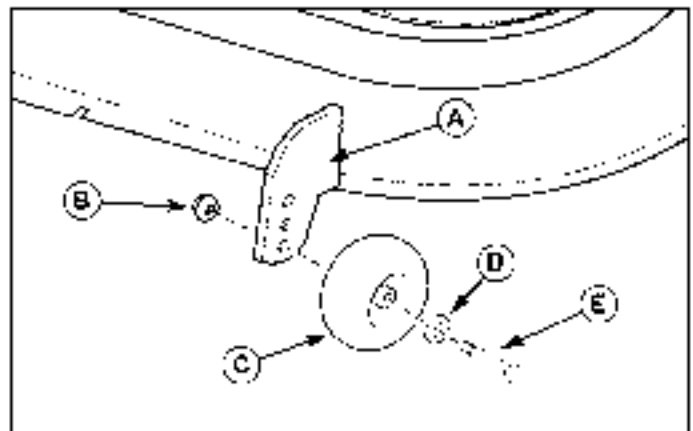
Fixed Bracket Gauge Wheel Adjustment
